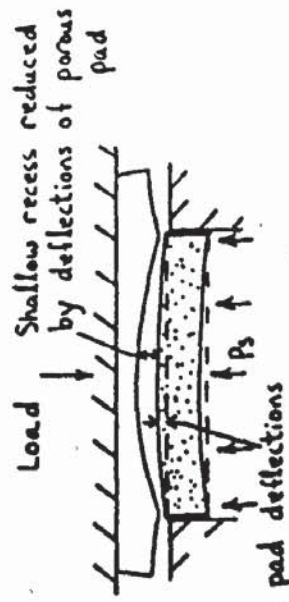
Porous and compliant aerostatic thrust bearing: bearing clearance geometry
